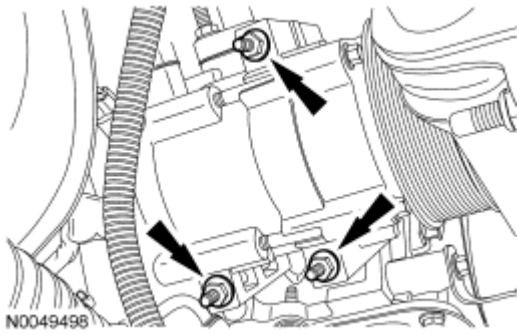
Identifying Stud Bolts & A/C Compressor Aside
